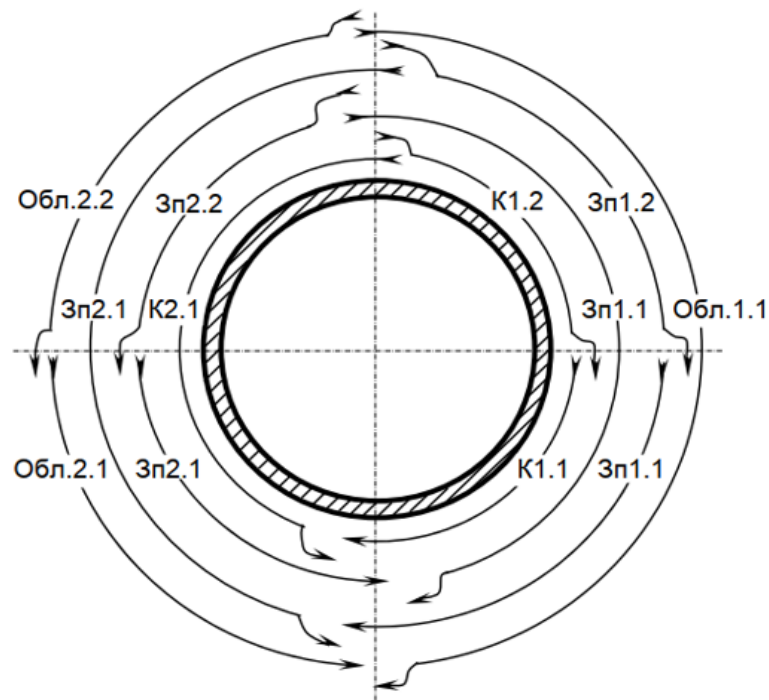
Recommended Welding diagram for CWS.02 nonrotating ring butt joints of pipes
